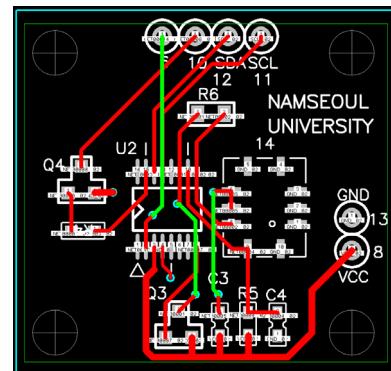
PCB Layout of Chemical detect signal sensing moudule
